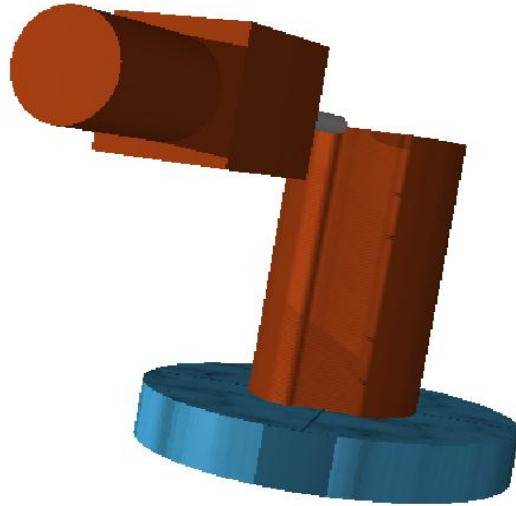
CYLINDER WITH GROOVE MACHINED IN THE END IN TOOL SIM
